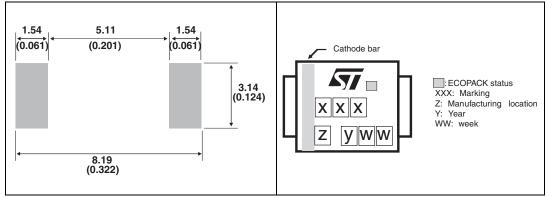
SMC footprint dimensions mm Figure 13. SMC marking layout<sup>(1)</sup> (inches)
